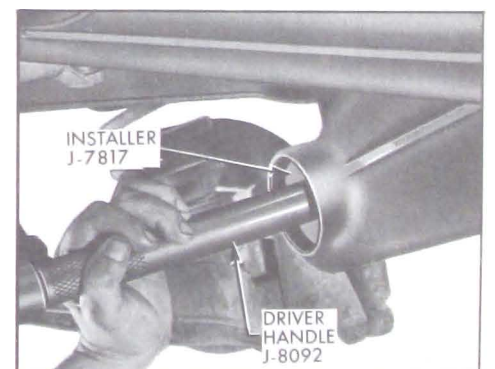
Installing Front Pinion Bearing Outer Race
